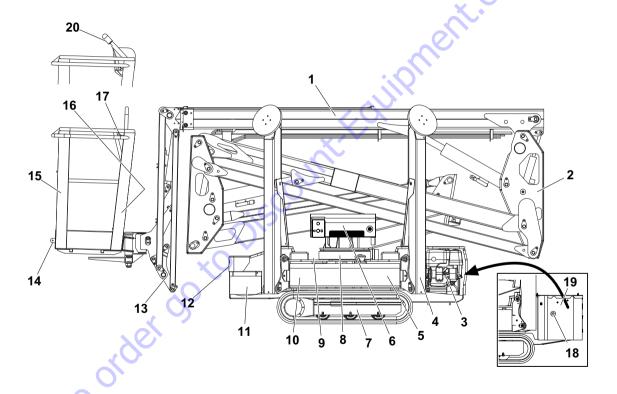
Basic Machine Nomenclature (Right Side View)
